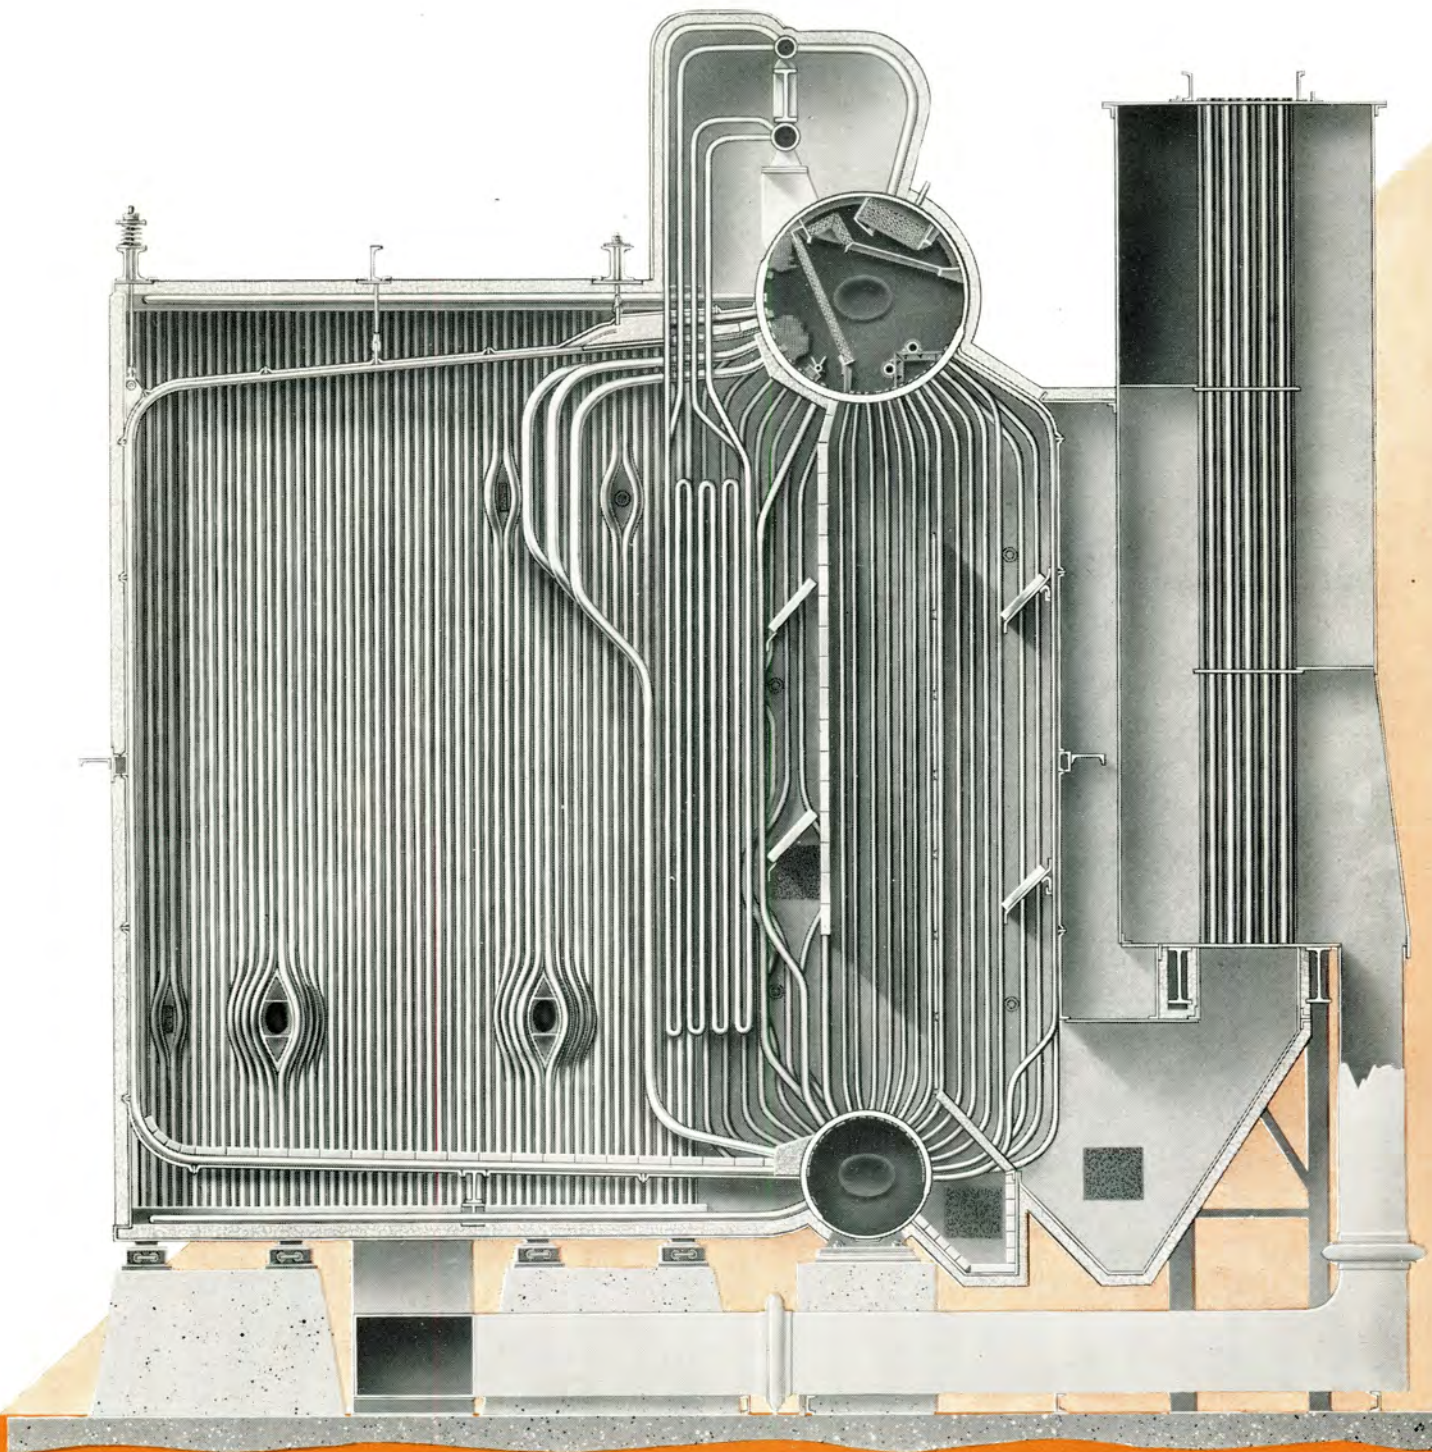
Sectional side elevation of C-E Type VU-55 Boiler with C-E Superheater and C-E Tubular Air Heater. Boiler is completely bottom-supported and has double casing and C-E Tangential Burners.
